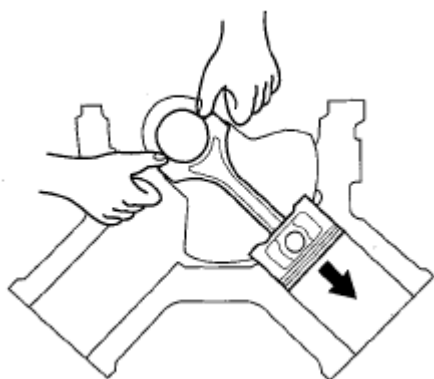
Identifying Correct Procedure Of Removing Piston/Connecting Rod Assembly
